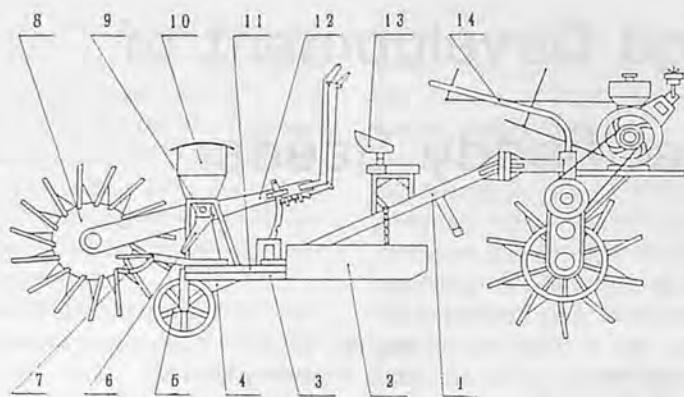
The diagram of the seeder. (1. Draw frame 2. Mudguard 3. Ridge-former 4. Furrow opener 5. Transportation wheel 6. Seed tube 7. Seed press board 8. Driving wheel 9. Seedmeter 10. Seed box 11. Slide board 12. Lifting mechanism for driving wheel 13. Operator seat 14. Draw power)
